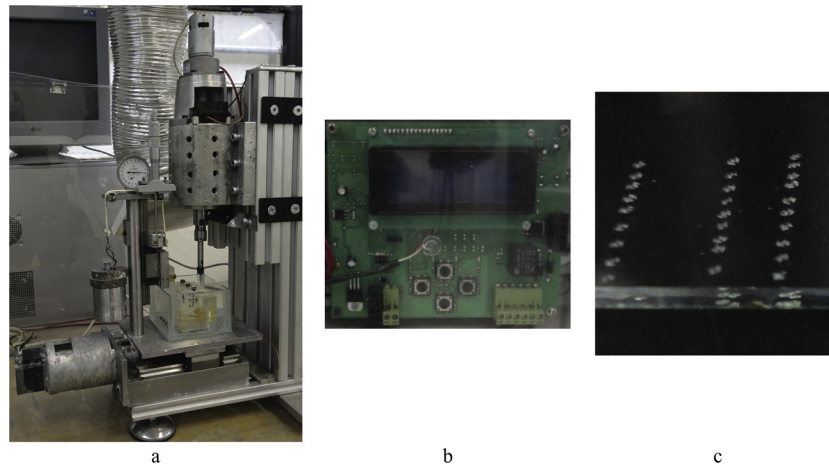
a) Experimental configuration b) Electric board (electric pulse generation) c) A sample of fabricated holes on the workpiece [21,22].
